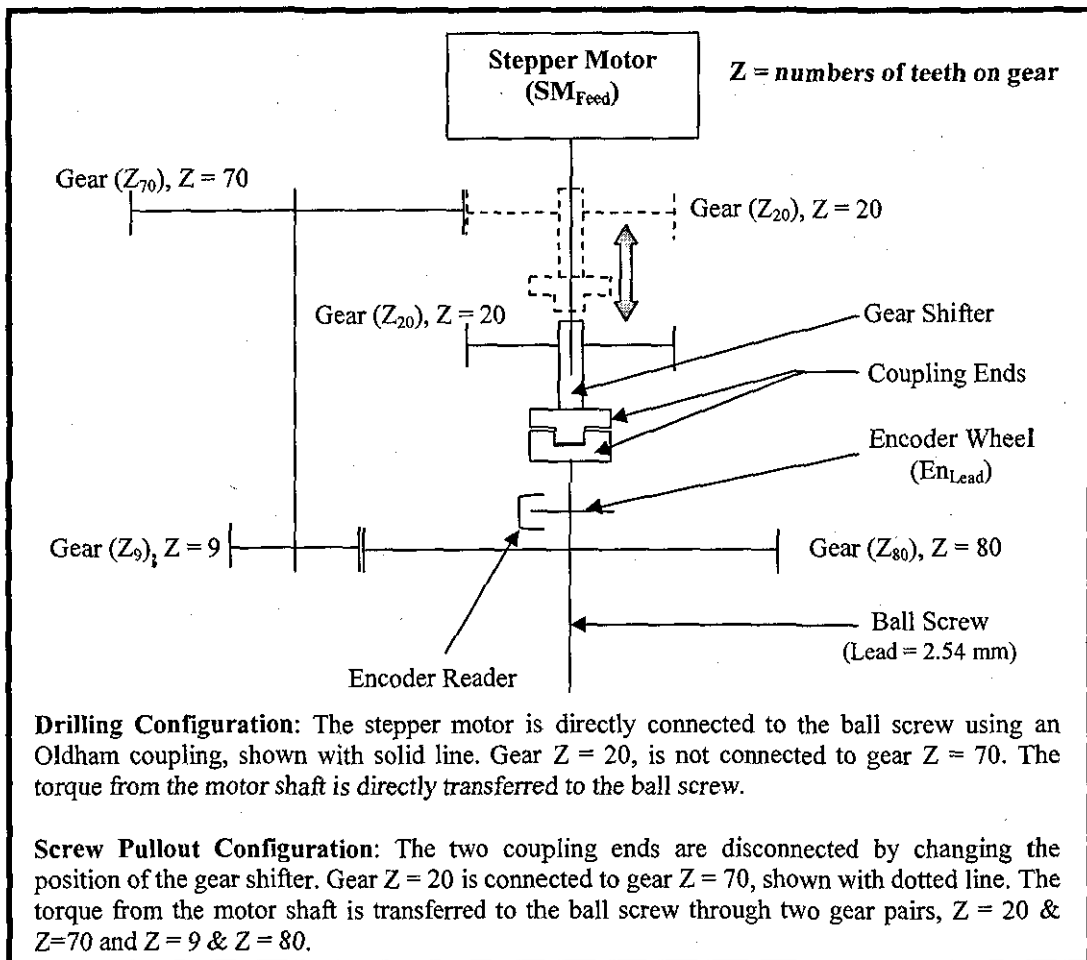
Schematic Diagram Illustrating Gear Shifting Mechanism used for Drilling and Screw Pullout Configuration in Feed Mechanism
